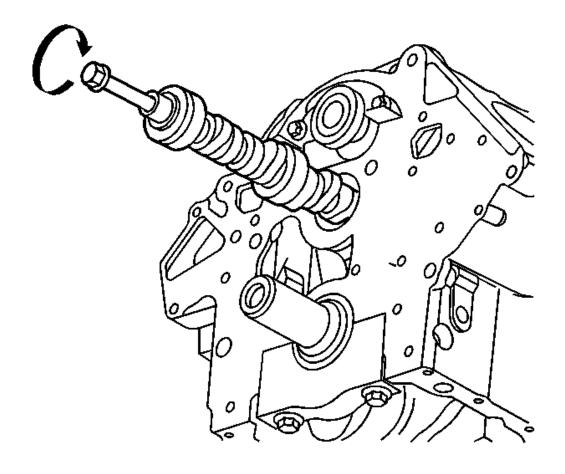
Camshaft Front Bolt Hole & Bolt Courtesy of GENERAL MOTORS CORP.
